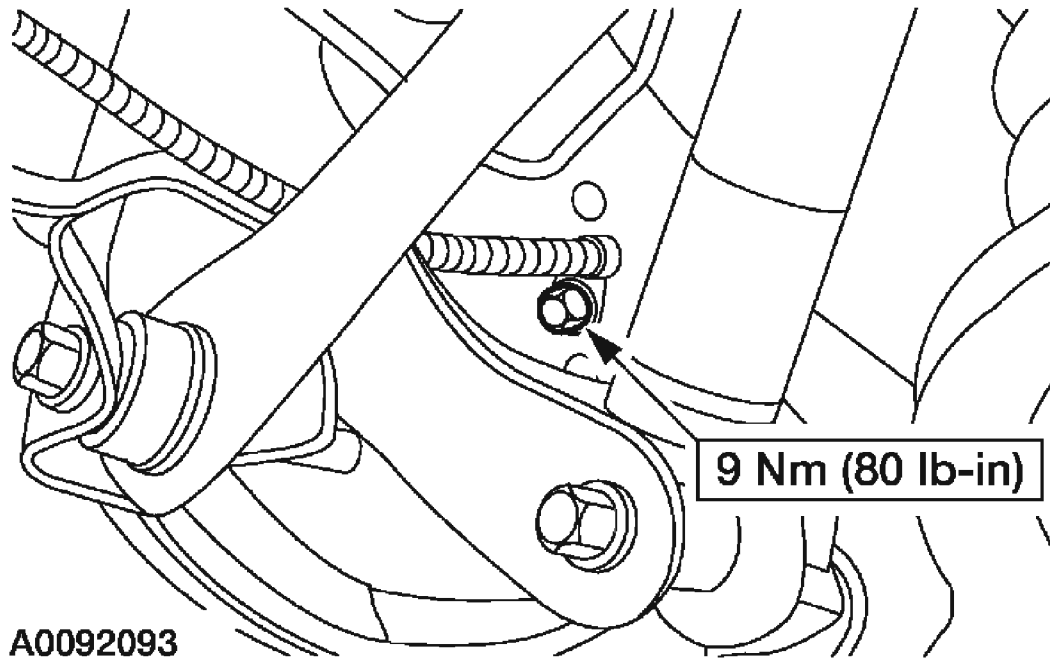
Disconnecting Rear Wheel Speed Sensor
